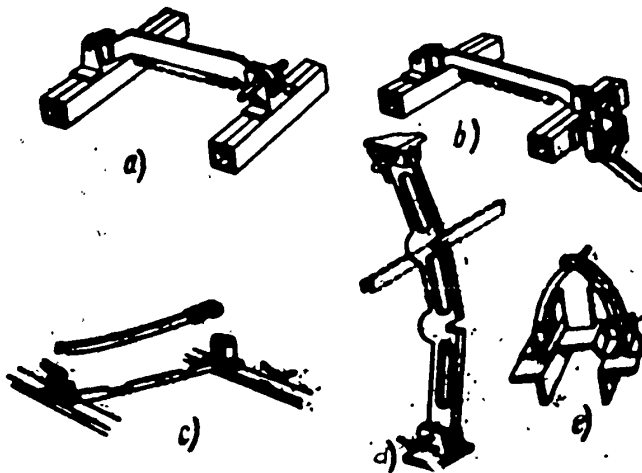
Several Types of Holders for Mounting to Assembly Fixtures
